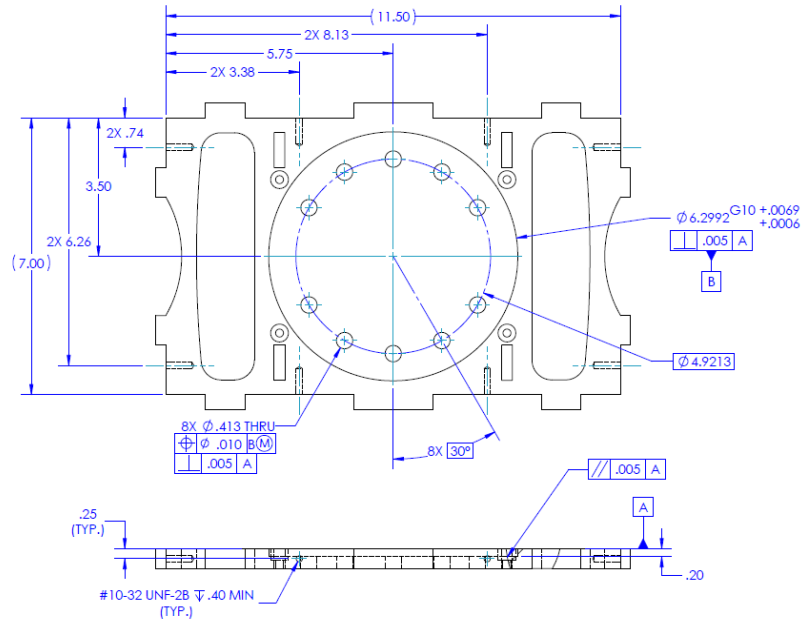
Example of GD&T used on the machining drawing #03-0411-0-A.
